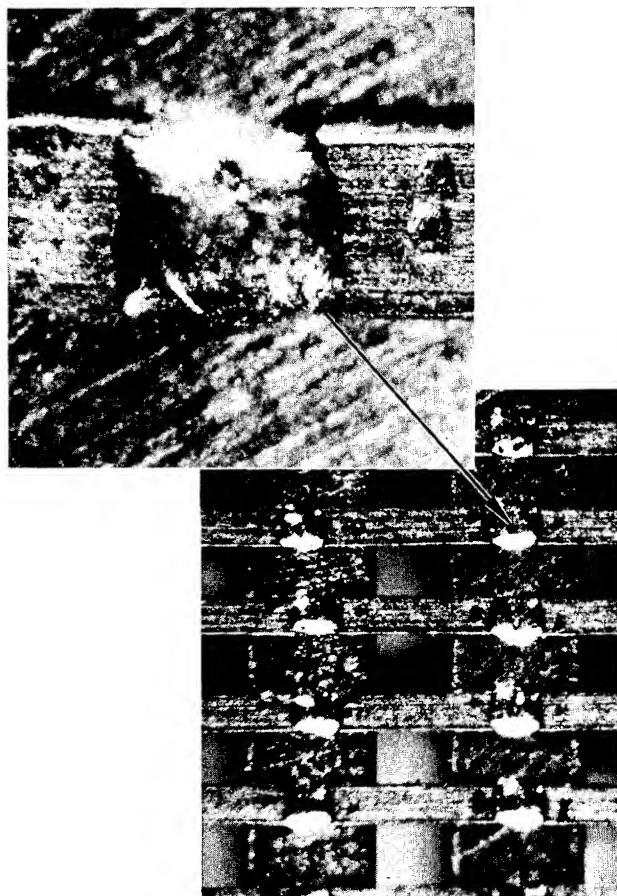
Closeup of several electron beam welds: 0.002 × 0.010 in. copper ribbons joined to 0.030-in.-thick metallized alumina.
